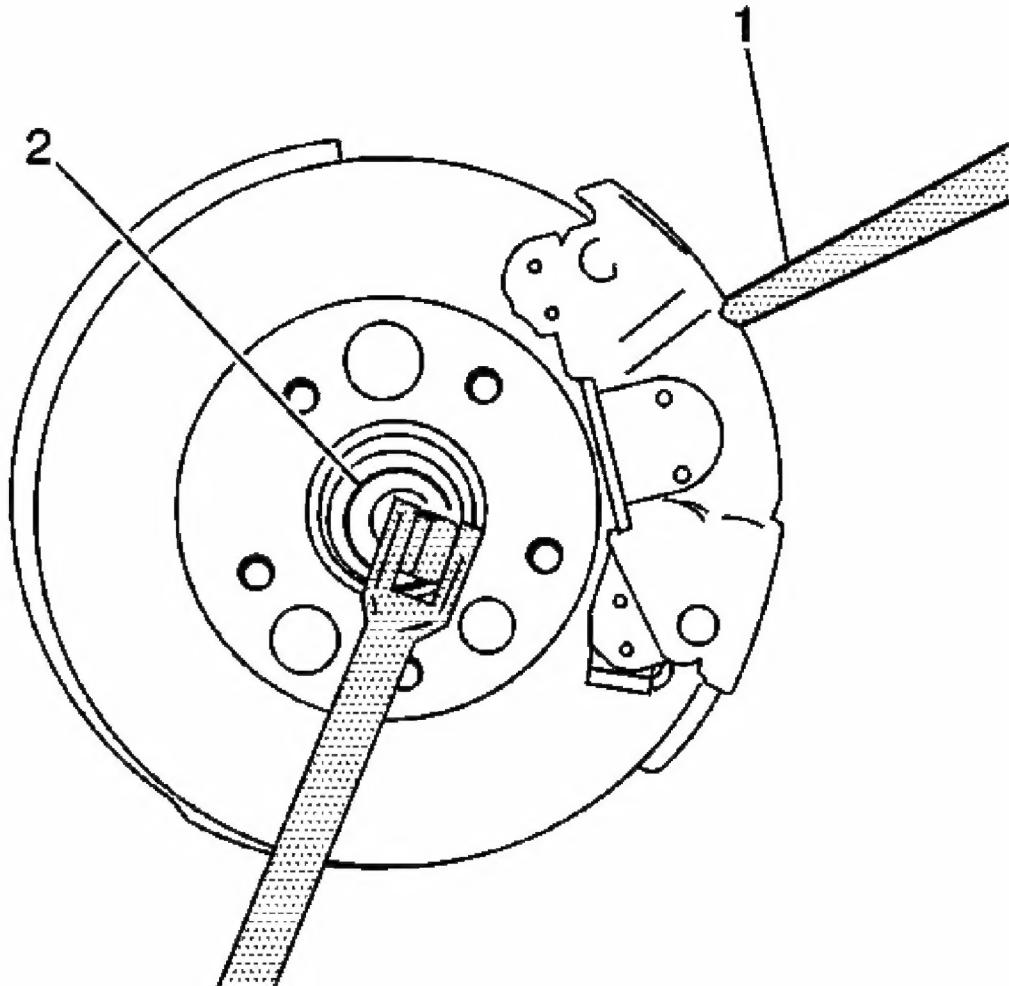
Preventing Rotor Turning Using Drift Or Punch
